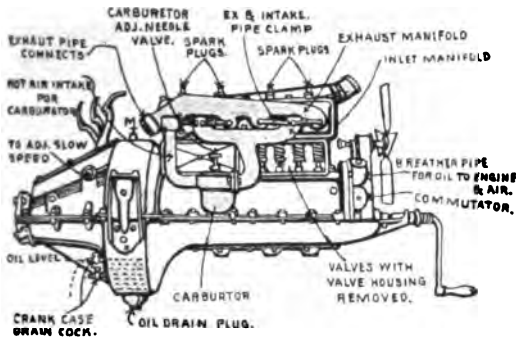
Right side of Ford model T unit power plant. Showing inlet and exhaust manifold and valves.
